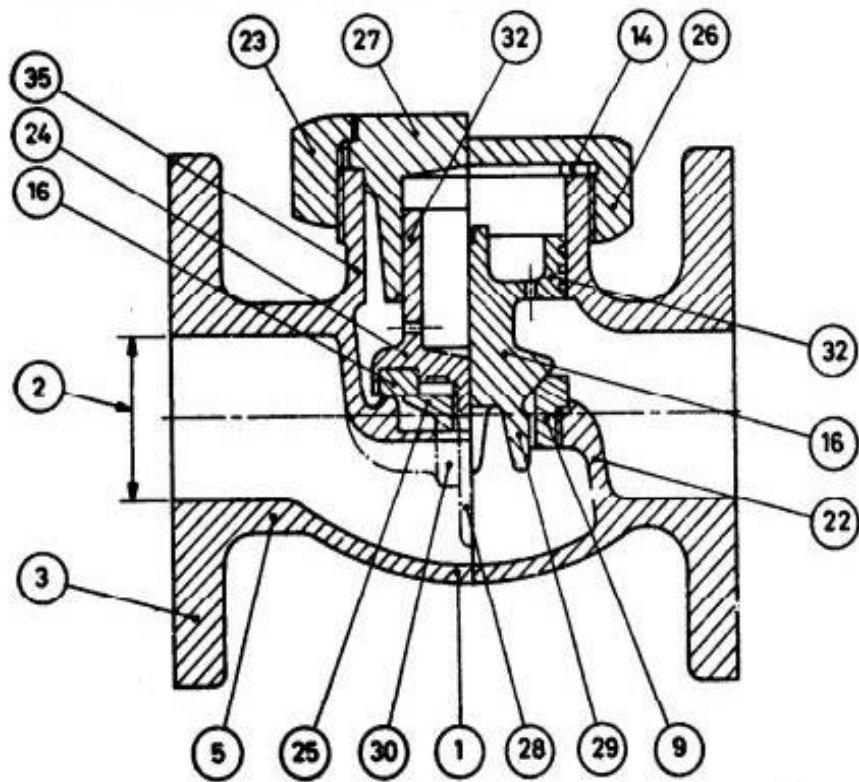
HORIZONTAL PATTERN LIFT TYPE PISTON CHECK VALVE
